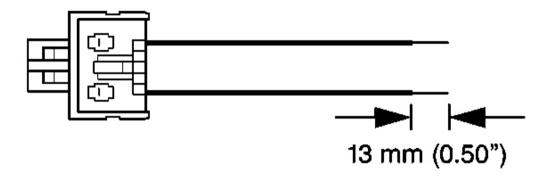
Stripping Connection Wire Leads Courtesy of GENERAL MOTORS CORP.
